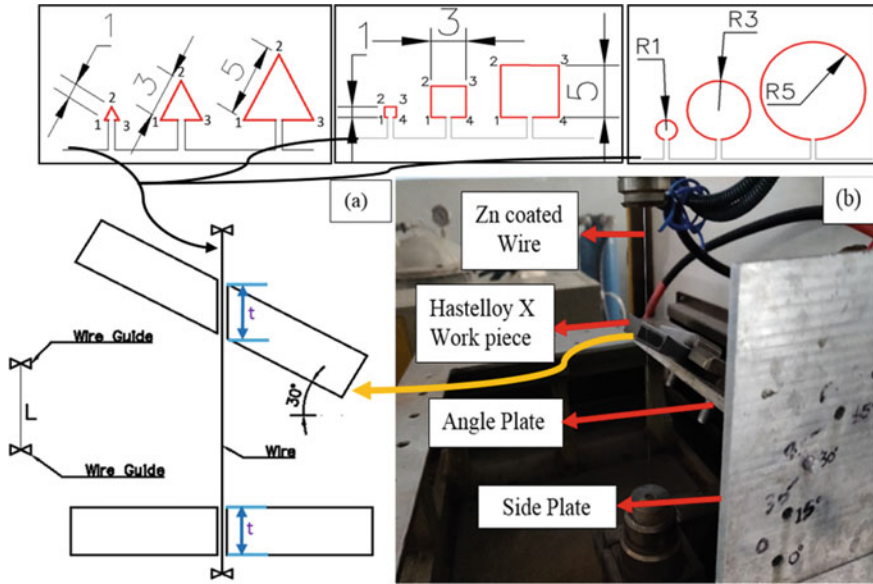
a Workpiece at different slant angle by slant fixture, b slant fixture
